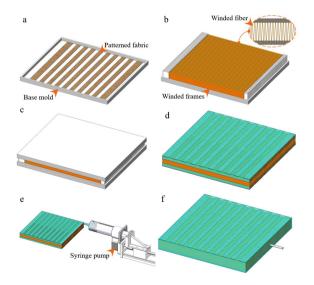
Improved SRP fabrication. a:mold preparation, b:first layer molding, c:second layer molding, d:halfway SRP after demolding, e:channel filling process, f:final SRP after wall sealing.
